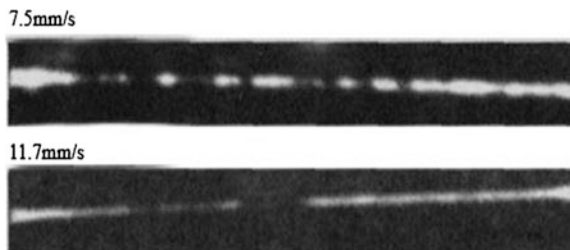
Heat images of welding specimens with different welding rate [26]
